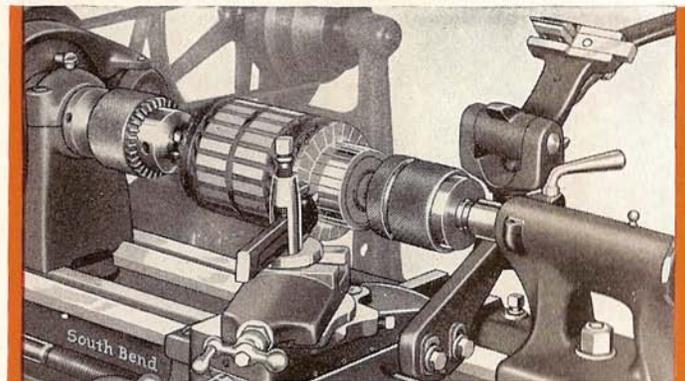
A Centerless Armature Mounted in Lathe for Truing.
